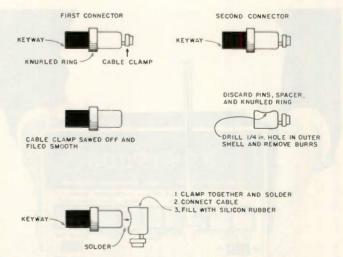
Ensure that there is a cable sheath, or add spaghetti, where the wires pass through the soldered junction. This will prevent chafing.
